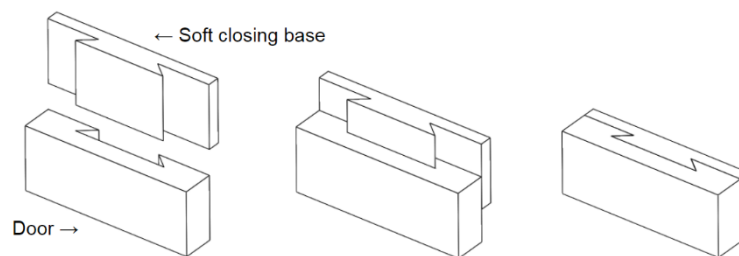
Example of the kind of fitting used for this solution and what parts that represent an example of the real parts.
